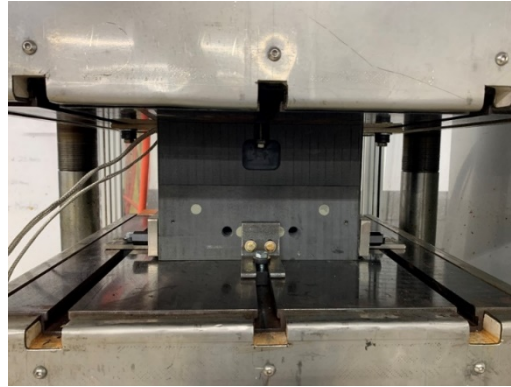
The smaller and lighter 3D-printed composite tool mounted in the press
